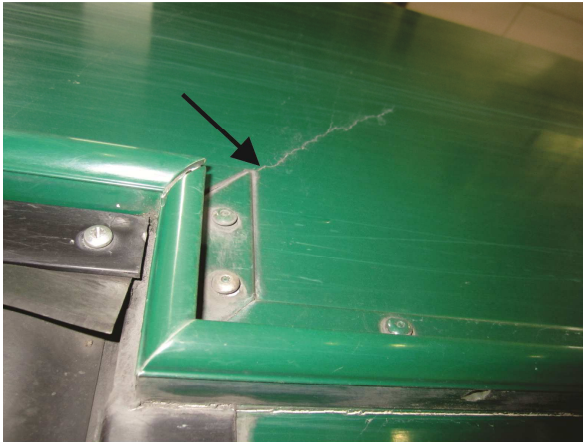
VMM EXIT DOOR PANEL THAT WILL BE REMOVED AND SET OFF TO THE SIDE.
